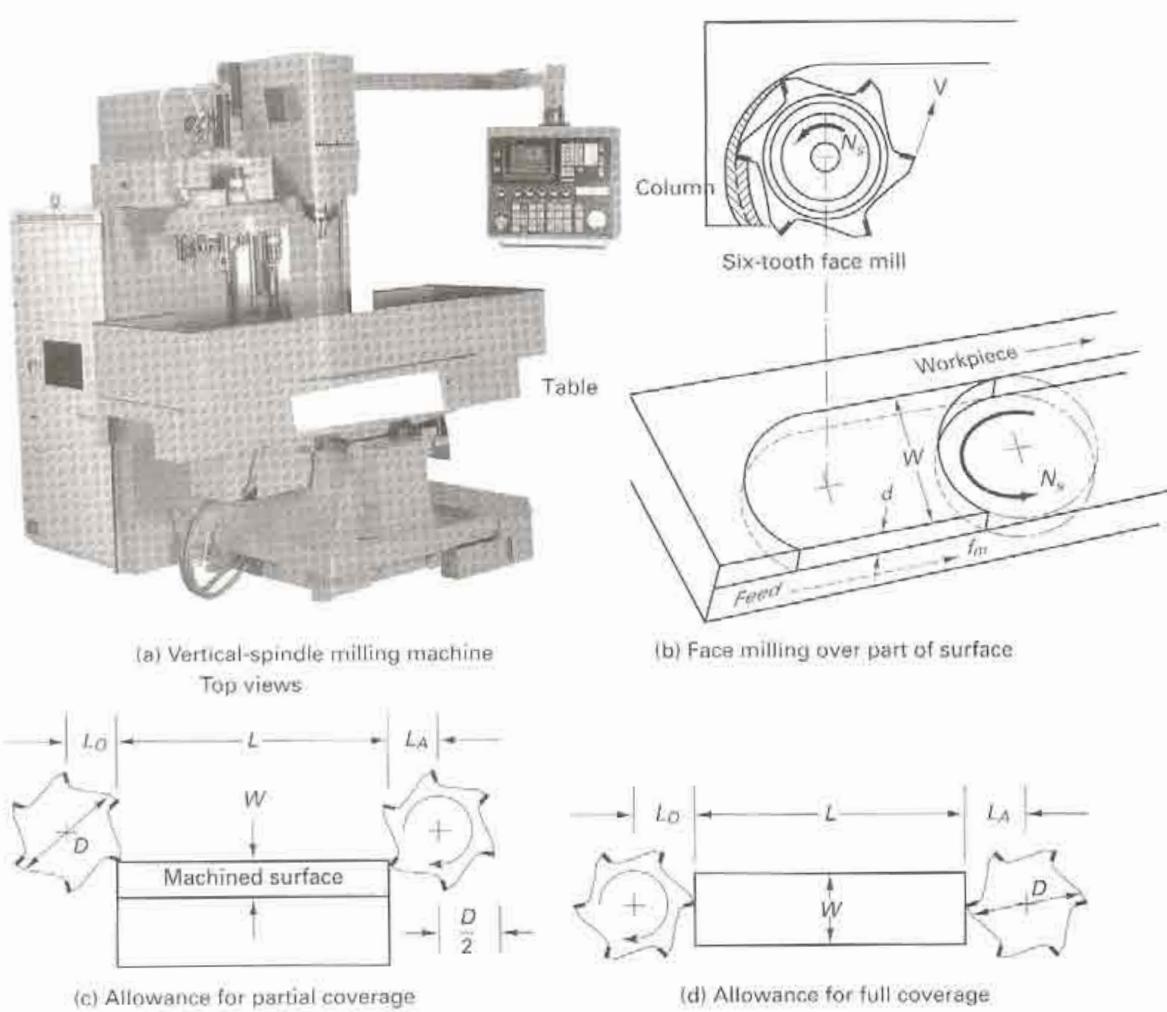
Face milling is often performed on a spindle milling machine using a multiple-tooth cutter ($n = 6$ teeth) rotating N_s at rpm to produce cutting speed V . The workpiece feeds at rate f_m in inches per minute past the tool. The allowance depends on the tool diameter and the width of cut.
